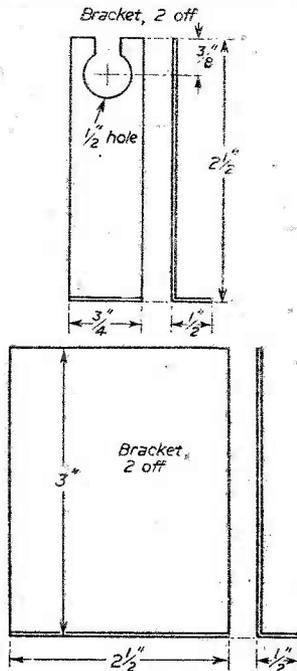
Details of the Ferrite Rod mount and bracket for output transformer.
